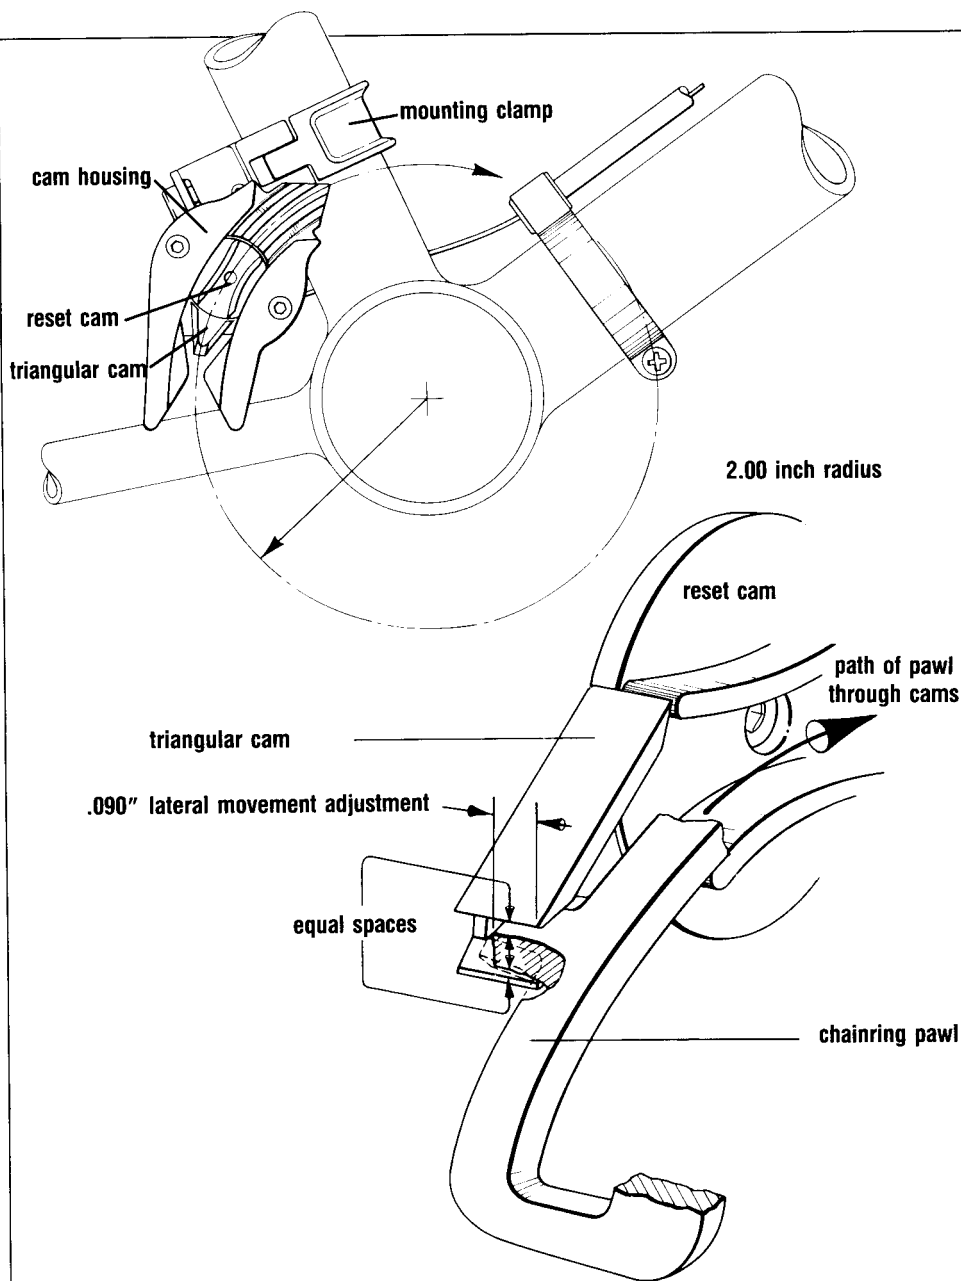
Selector assembly in position on seat tube (upper drawing). Triangular cam and reset cam control the path of the pawl. Lower drawing shows critical alignment between pawl and cams.
